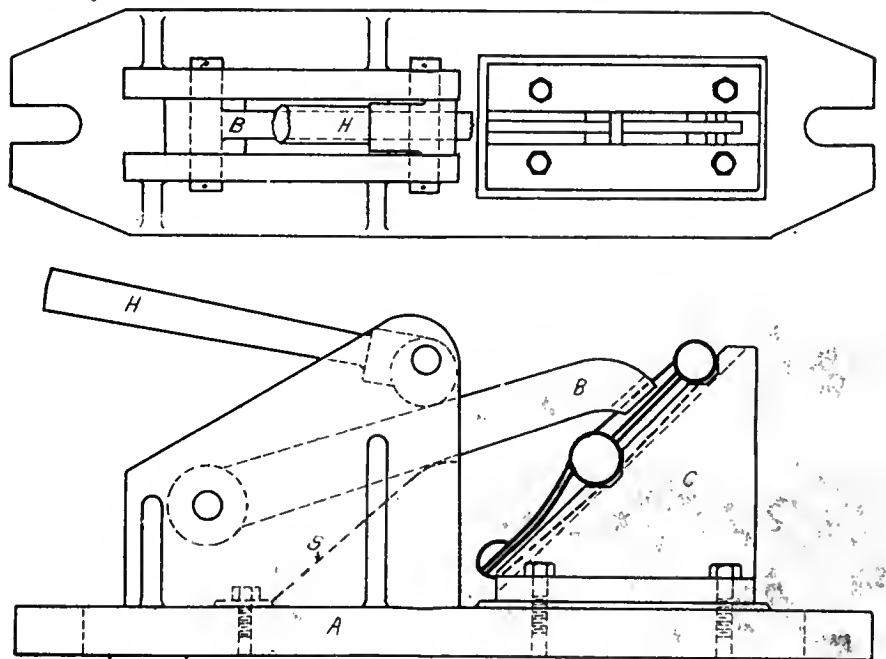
MILLING FIXTURE FOR DROP-FORGED ROCKER ARM
